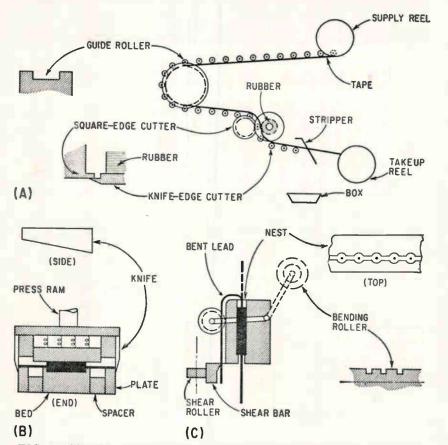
Sketches illustrate the operation of the roller-cutter for tapepackaged components (A), cutter (B) and cutter-bender (C) for strippackaged components
